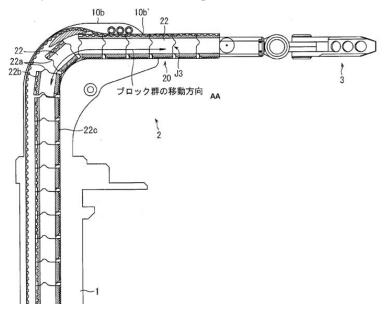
Linearly Moving Extendable Mechanism and Robot Arm Equipped with a Linearly Moving Extendable Mechanism
